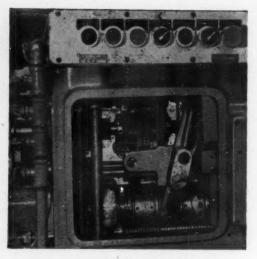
Close-up View of the Gearbox with One of the Side Covers Removed
